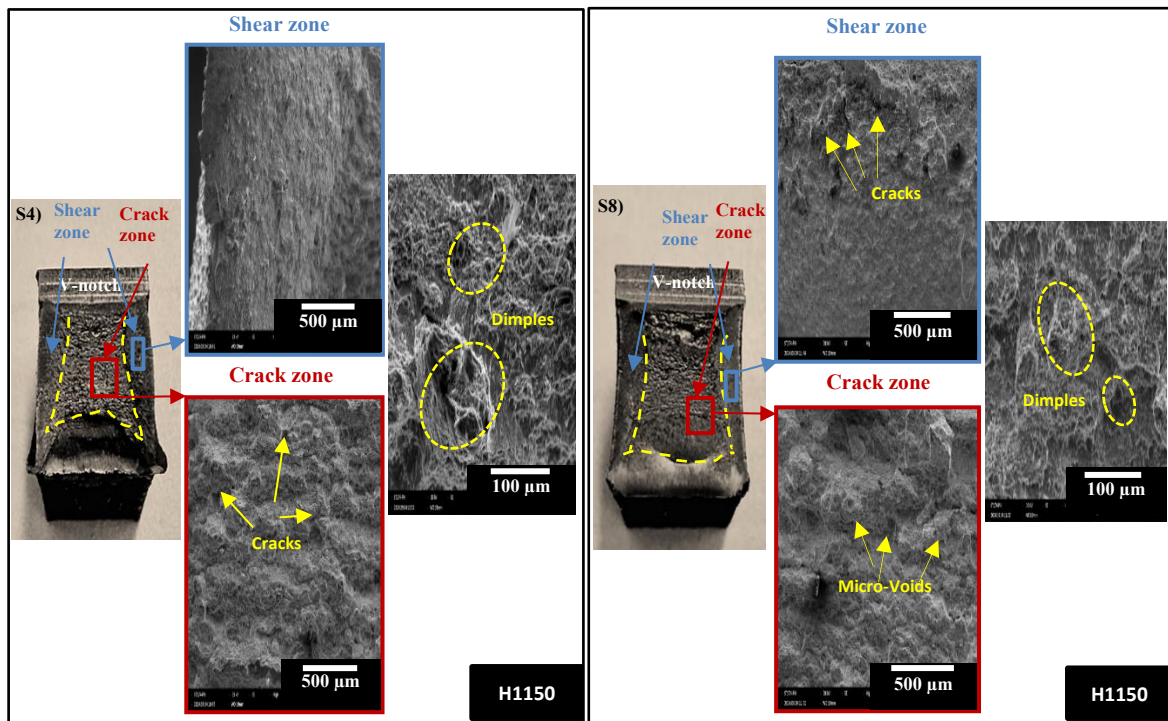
SEM fractography of Charpy impact fracture surfaces of 17-4 PH stainless steel specimens aged H1150. (a) Specimen S4, (b) specimen S8.
